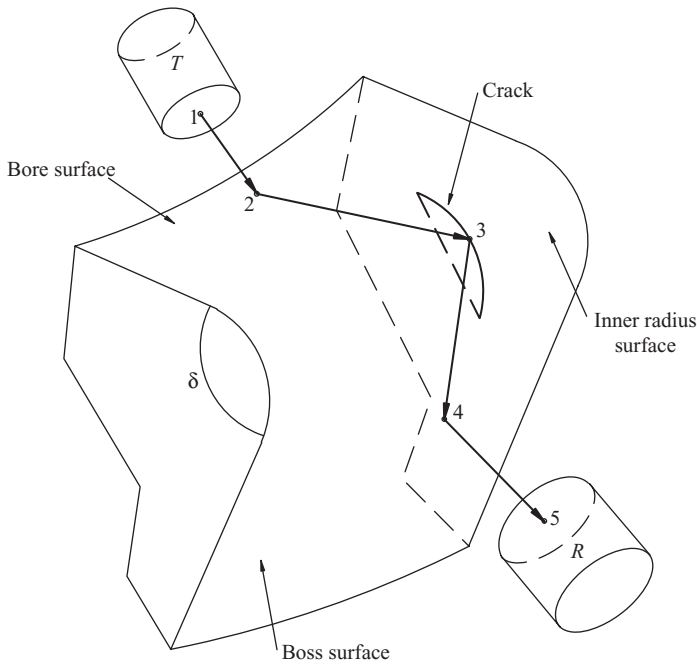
Conceptual design of an inner radius immersion technique inspection from the inside of the nozzle.
